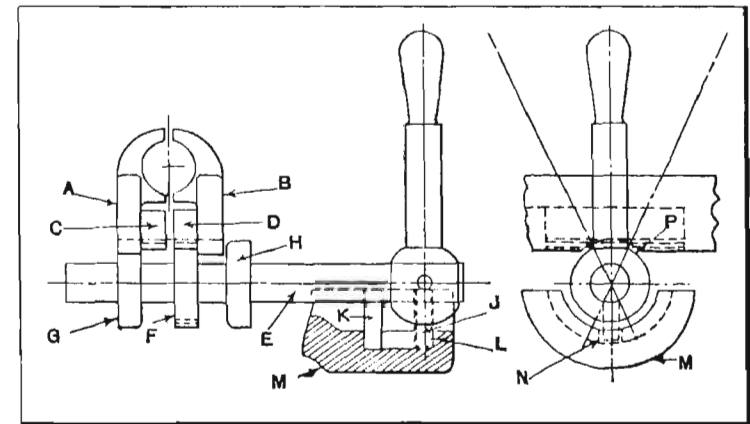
Interlocking Single-lever Control for Two Sets of Gears
